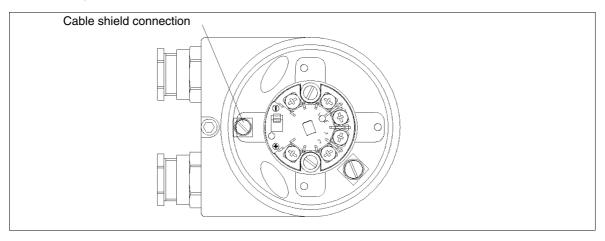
Top view open field housing TF202 / TF202-Ex Cable shield connection: To use for connecting the shield of the fieldbus and sensor cable.
